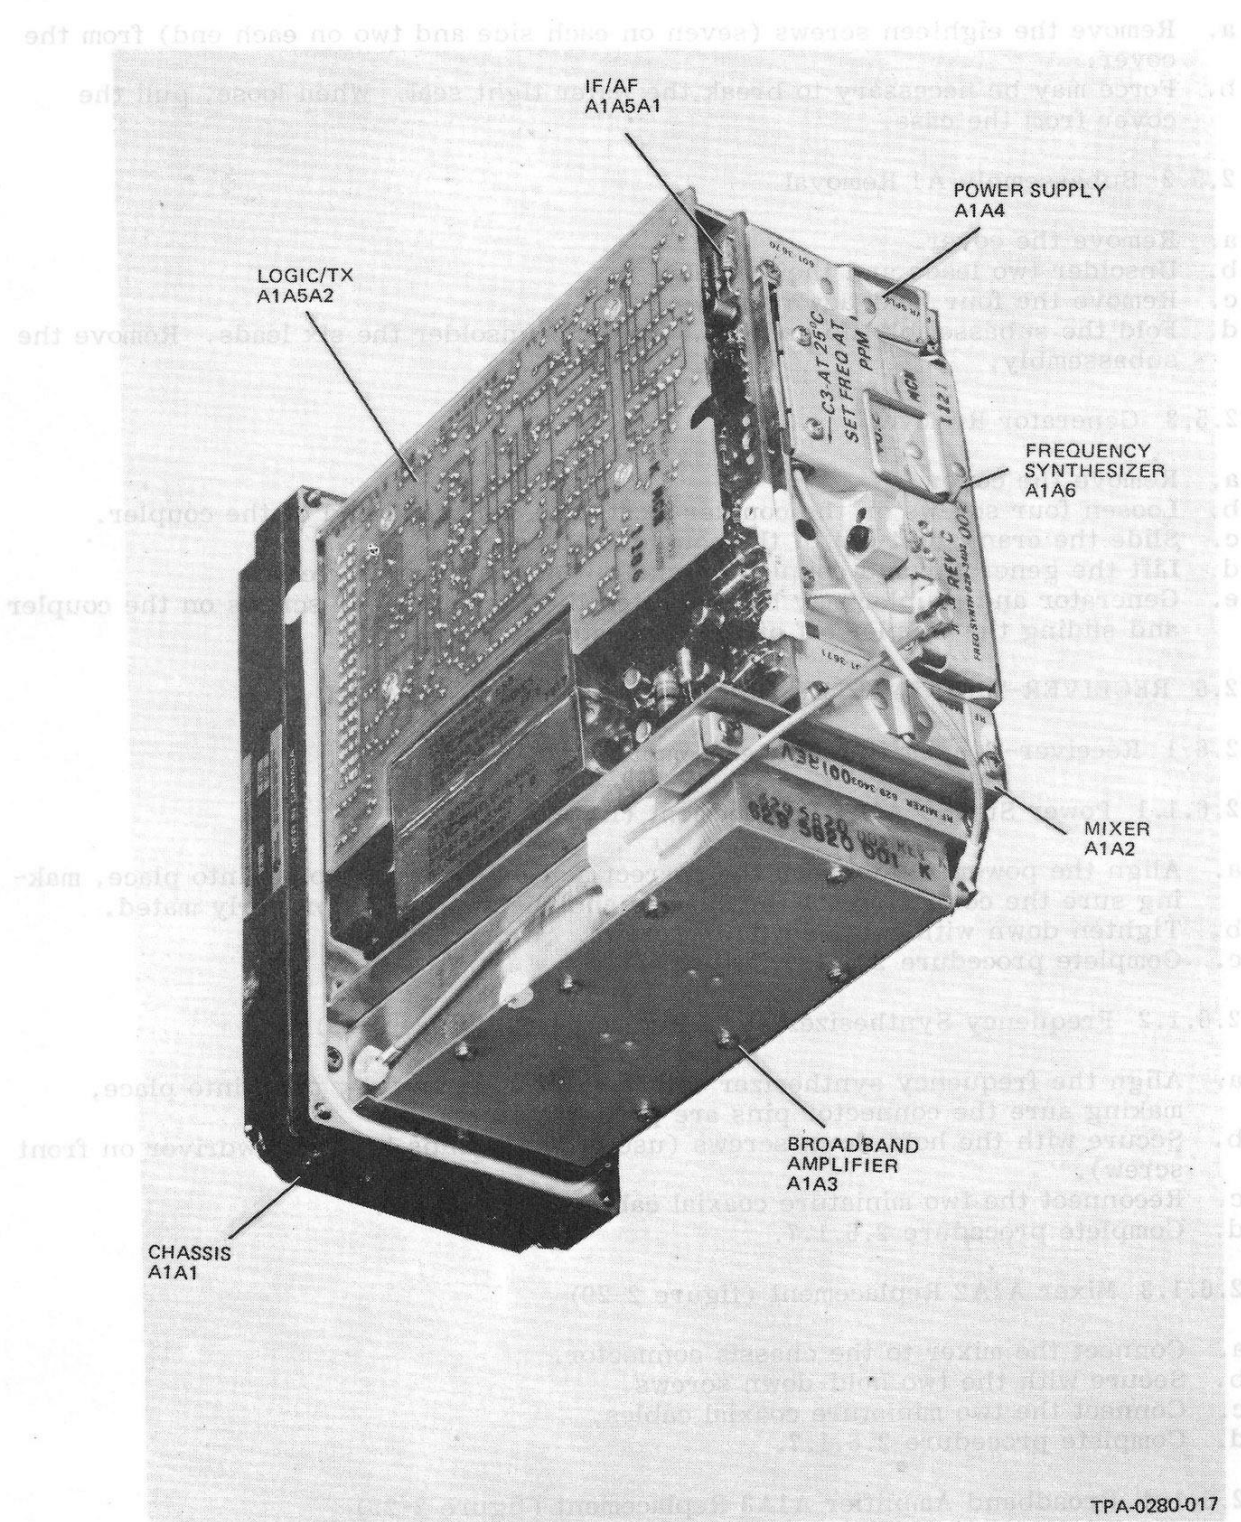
Receiver-Transmitter A1, Subassembly Location
